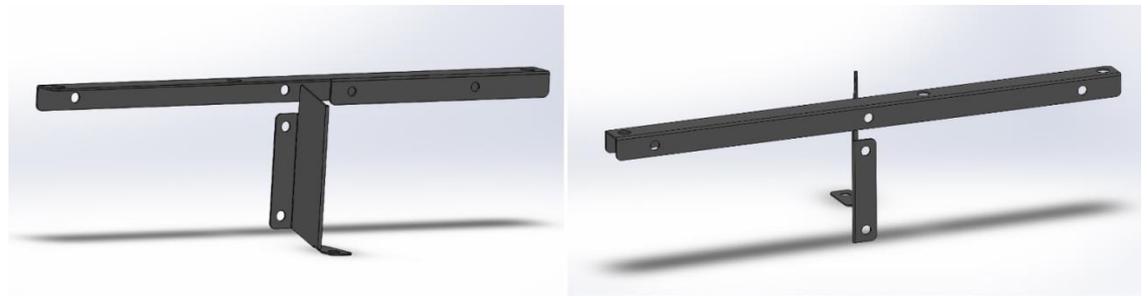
Sheet metal parts only, nut inserts and standoffs removed.
